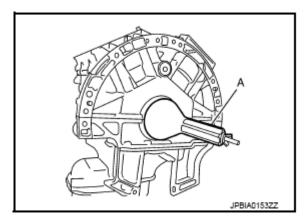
Pressing Rear Oil Seal Using Drift Courtesy of NISSAN NORTH AMERICA, INC.
